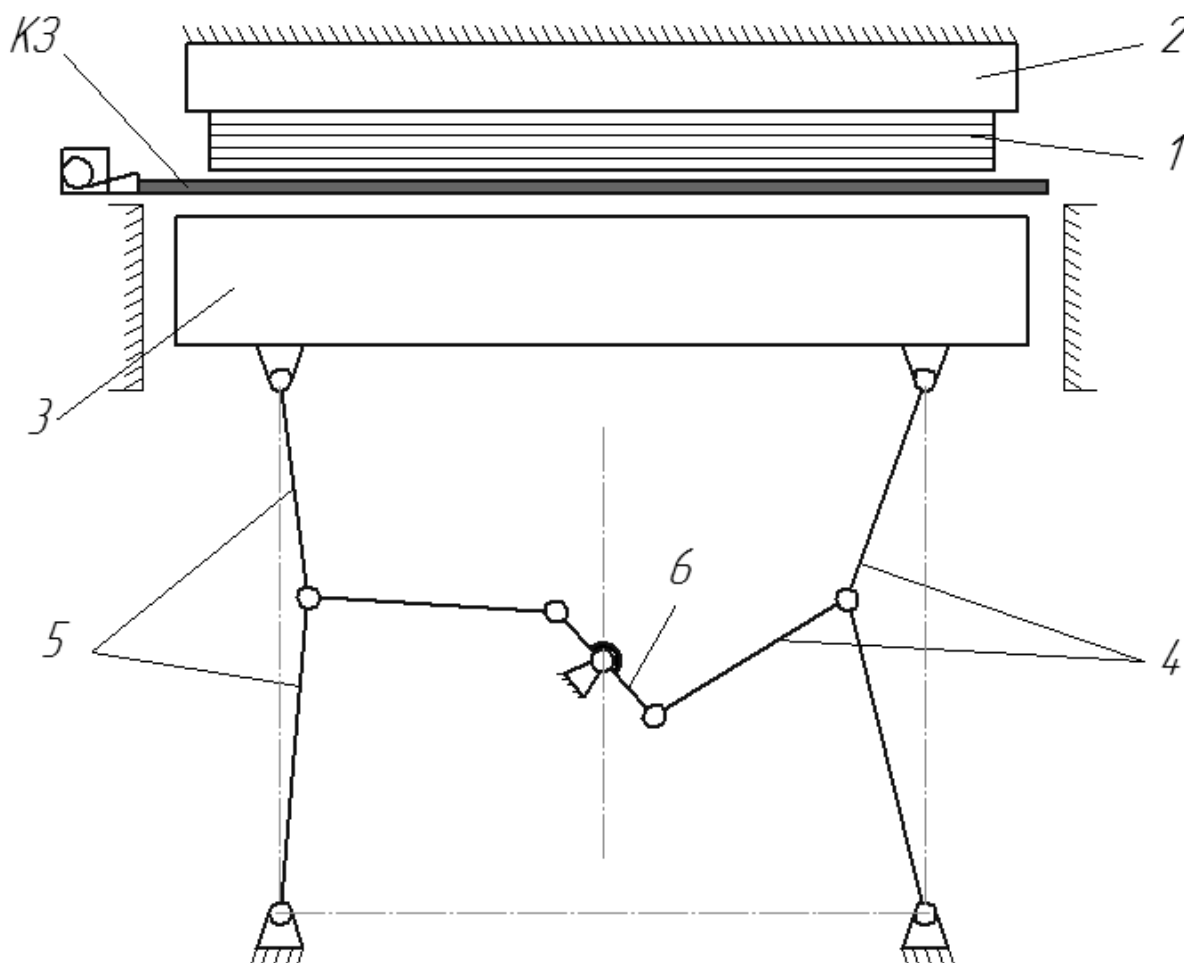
Scheme of main mechanism of diecutting machine / *Схема головного механізму штанцювального преса
